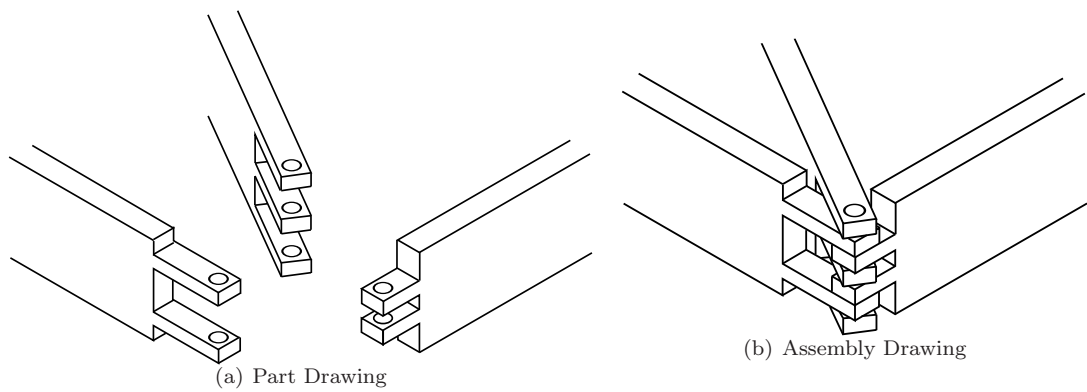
The pin-jointed members for the rectangular frame, shown separately and assembled.
